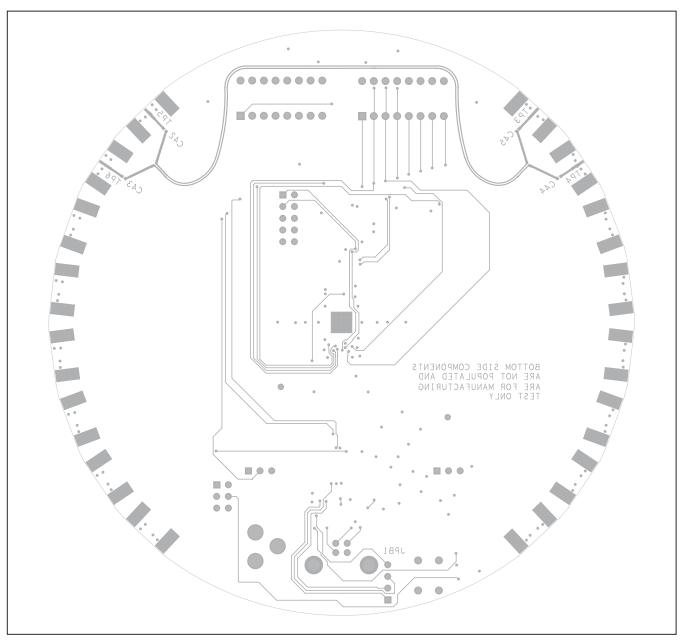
MAX3987 EV Kit PCB Layout—Solder Side (Sheet 4 of 4)
